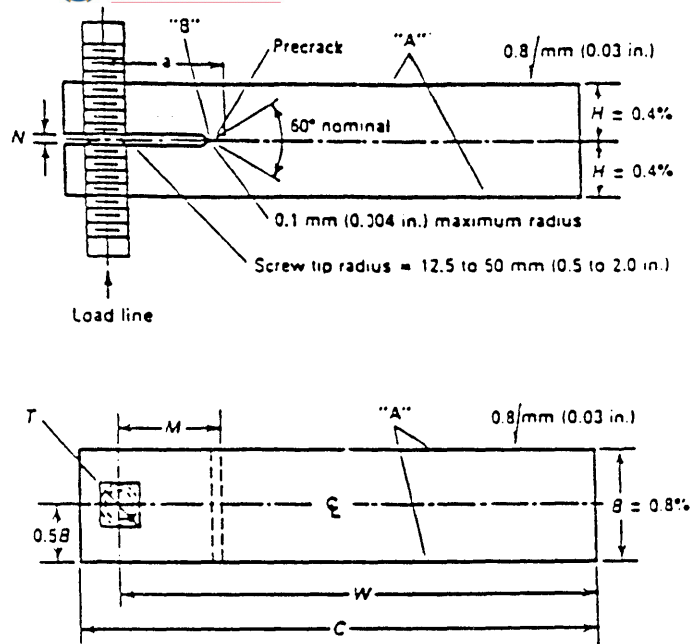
Proportional dimensions and tolerance used for the double cantilever beam (DCB) specimens.
